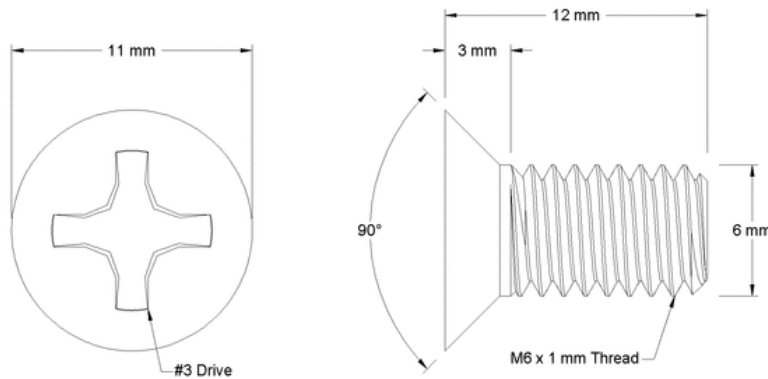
Metric 18-8 Stainless Steel Flat Head Phillips Machine Screw used to join our flange to the vault base.
